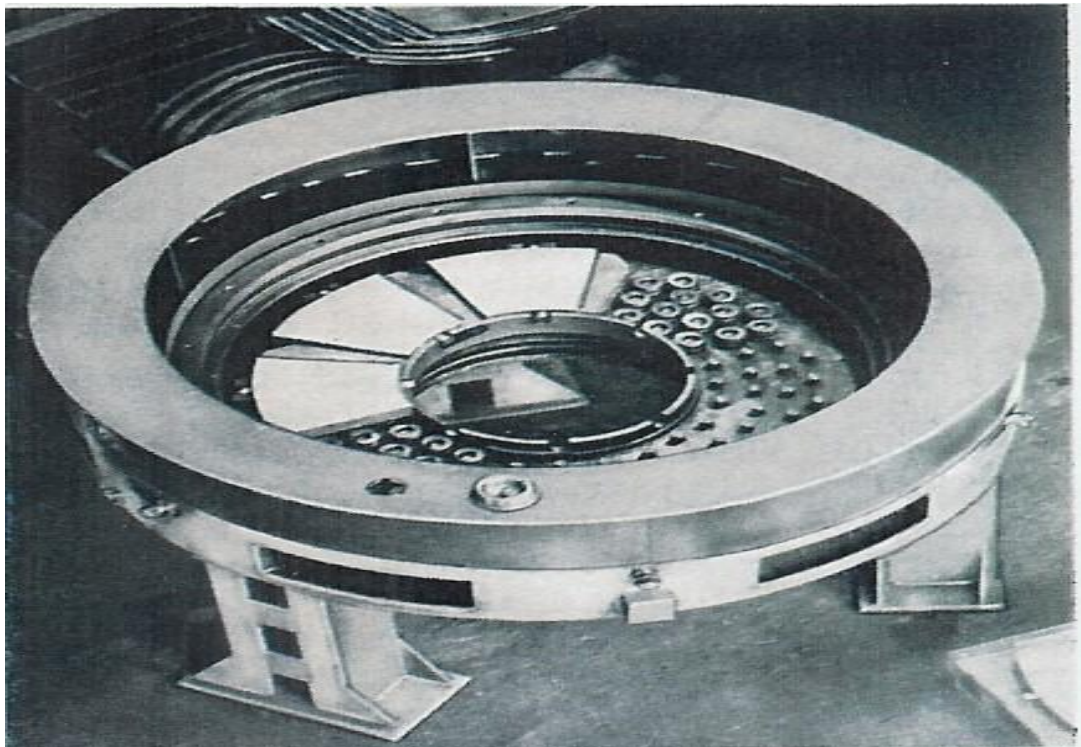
Thrust bearing frame with bearing pads and spring in position
